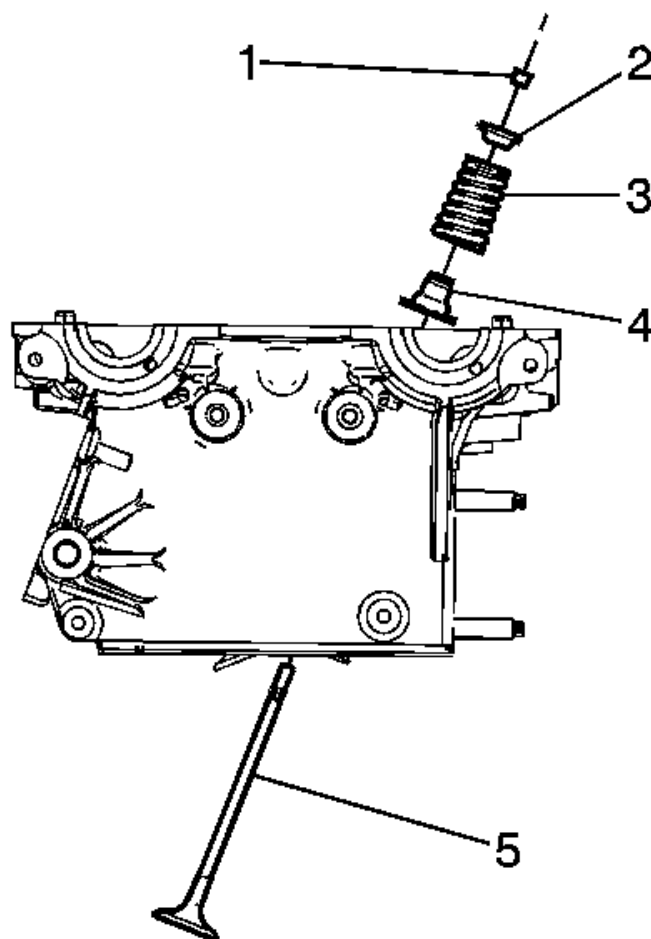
Valve Key, Valve, Spring, Retainer, And Seal
